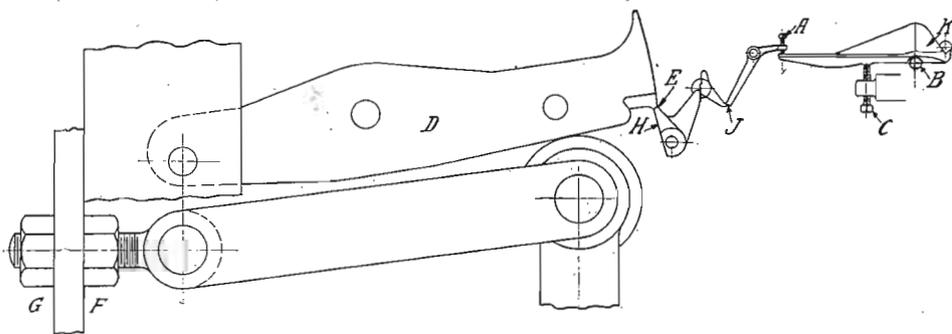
Sketch showing Tripping Mechanism of High-speed Circuit Breaker
